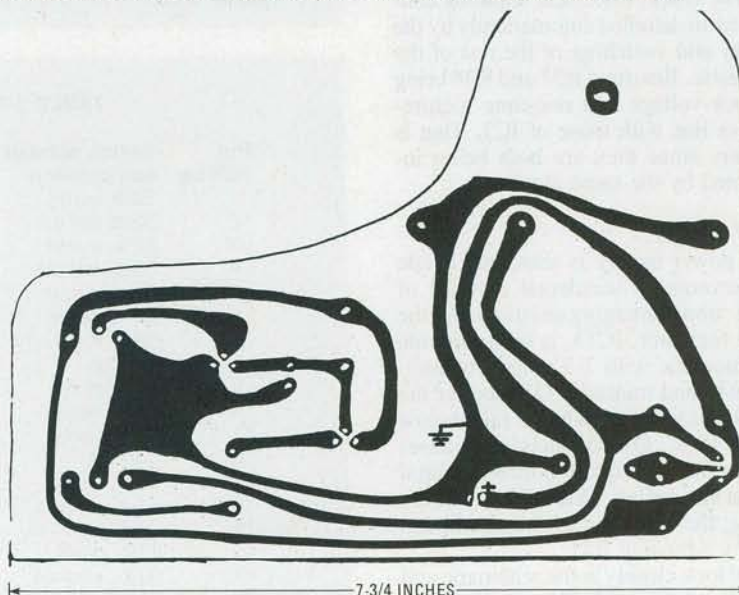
BOARD FIVE is shaped to fit the rear of a piano-shaped case. If a speaker is mounted on this board, the large hole at the top of the pattern will have to be further enlarged so that the speaker's magnet-housing fits snugly (see text).
